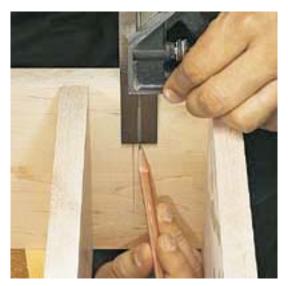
On the inside of the case, lay out the center of the Roto-Hinge countersink using the dimensions shown in the Builder's Plans.
